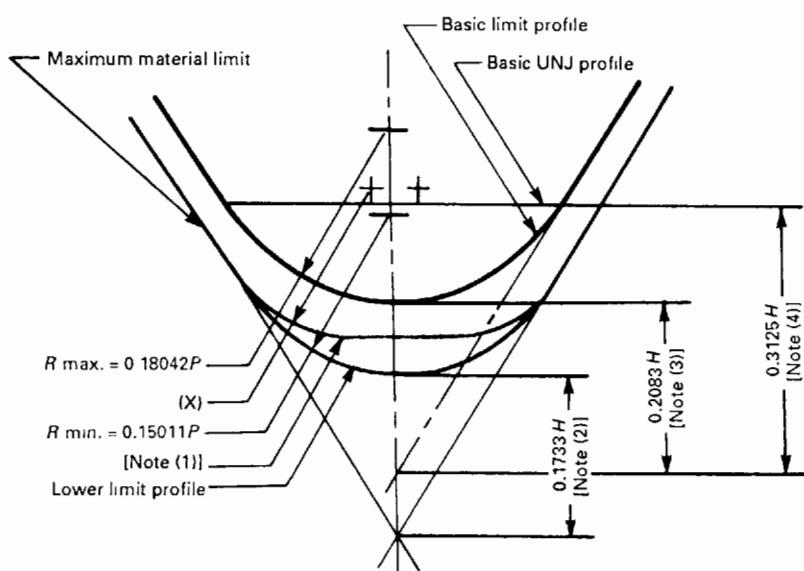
EXTERNAL UNJ THREAD DESIGN PROFILE AND TOLERANCES
